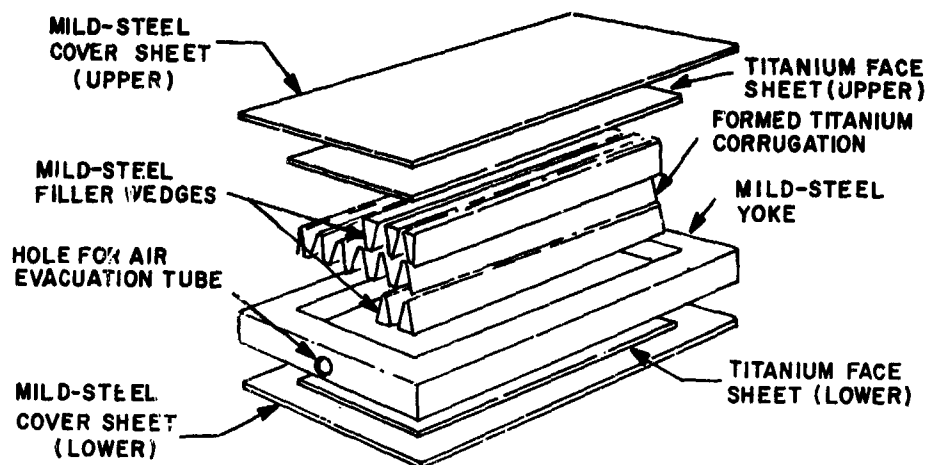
Pack Assembly of Corrugated Truss-Core Sandwich Panel for Roll Welding<sup>88</sup>
